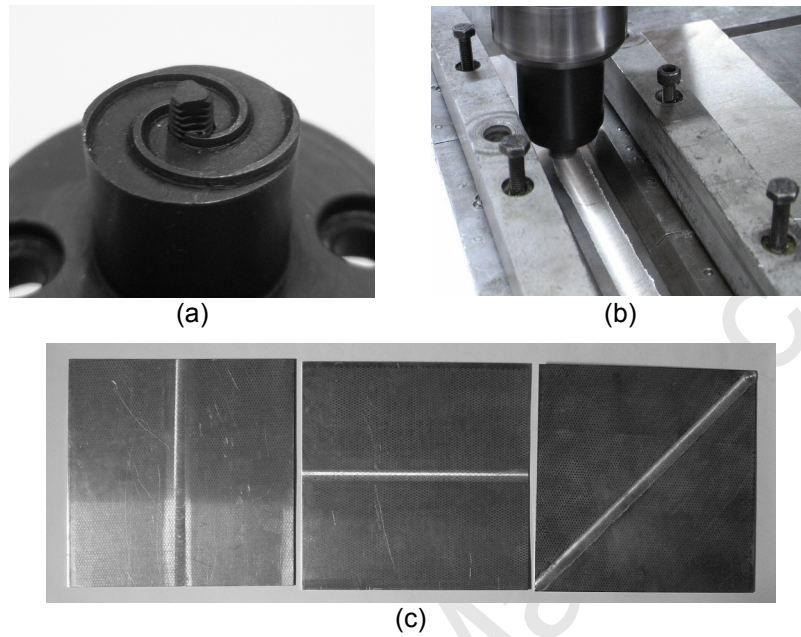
Production of AA1050-H111 tailor welded blanks by friction stir welding.
